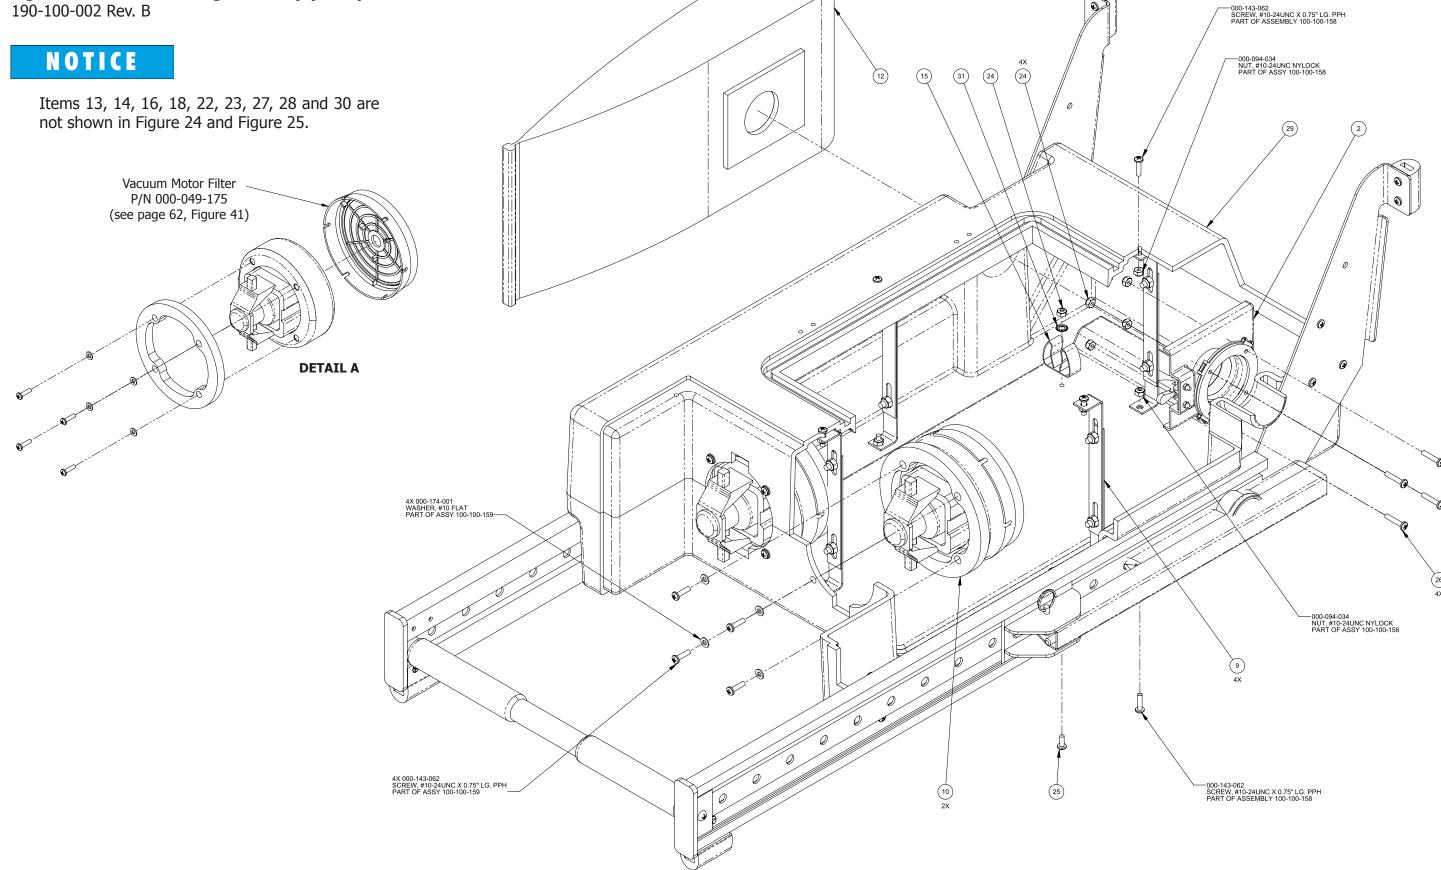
Frame Housing Assembly (120V) - View 2 of 2 190-100-002 Rev. B
